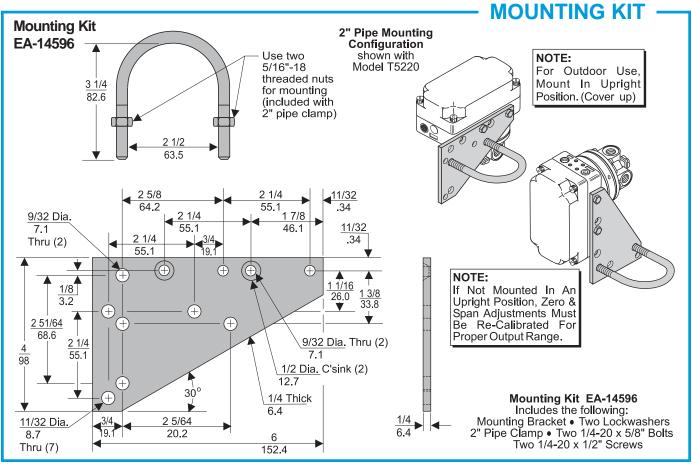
Mounting Kit EA-14596 shown with Model T5220. (Sold Separately)
